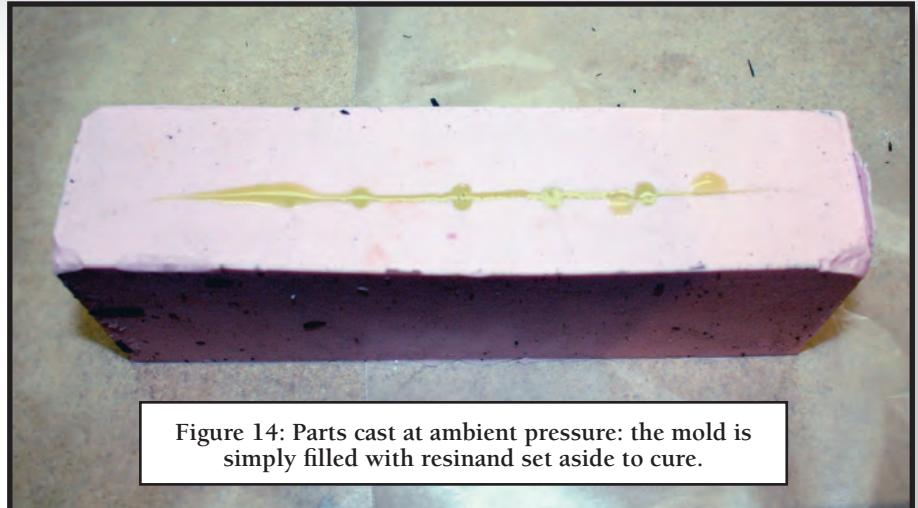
Parts cast at ambient pressure: the mold is simply filled with resin and set aside to cure.
